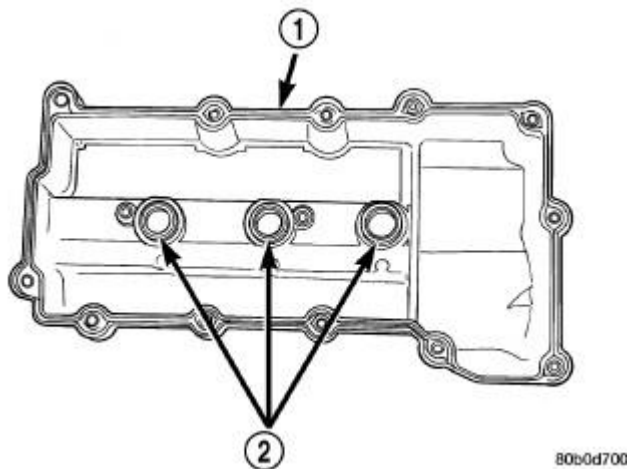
Cylinder Head Cover Gasket and Spark Plug Seals
